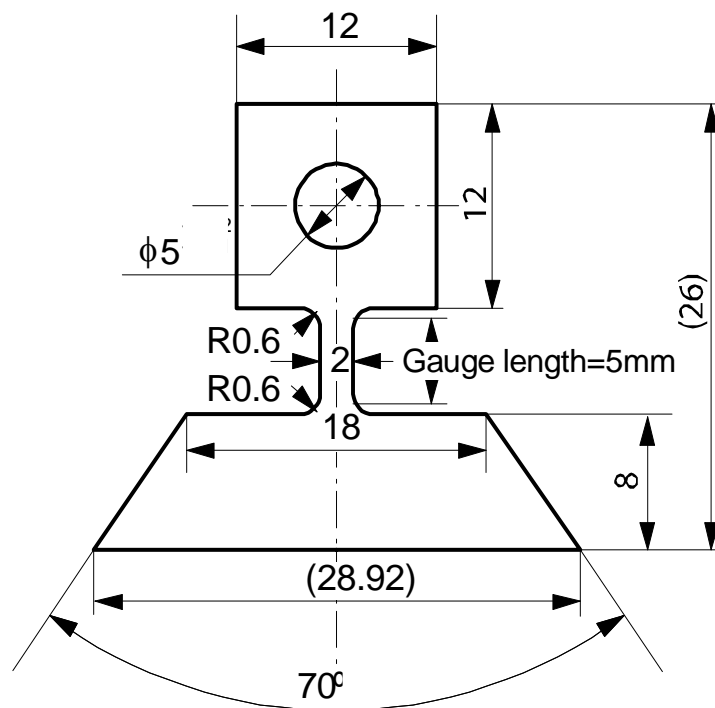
Geometry of grip-lee type test piece (in mm).
